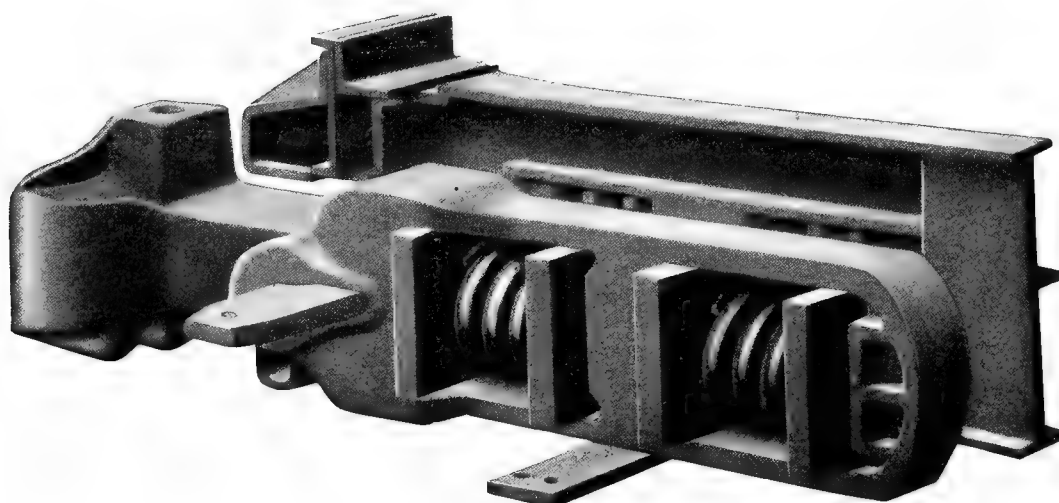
Application of Buckeye Cast Steel Keyed Yoke for Tandem Gears.
